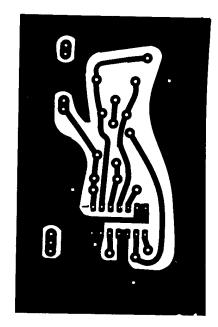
Printed circuit board for test circuit, full size (for TO-5 style package).
